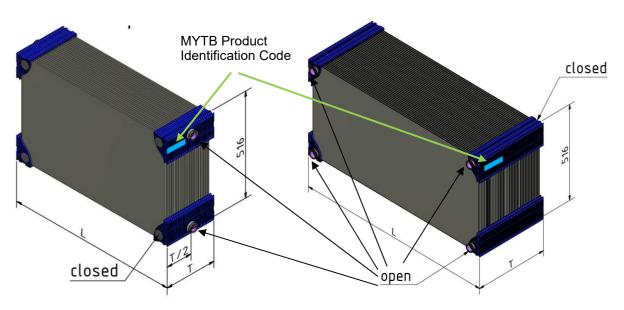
Standard MYTEX membrane blocks with side outlet (left) and with front outlet (right
